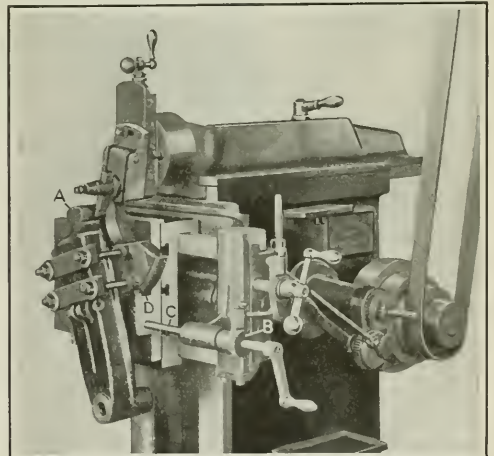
Use of Rotary Fixture for holding Shaper Rocker Arm to guide Work for shaping Bearing *A
